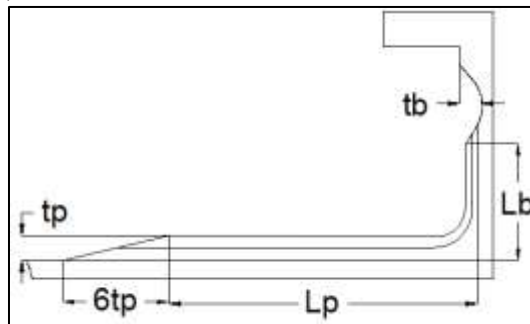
Dimensions of reinforcing pad and nozzle overlay [1]
